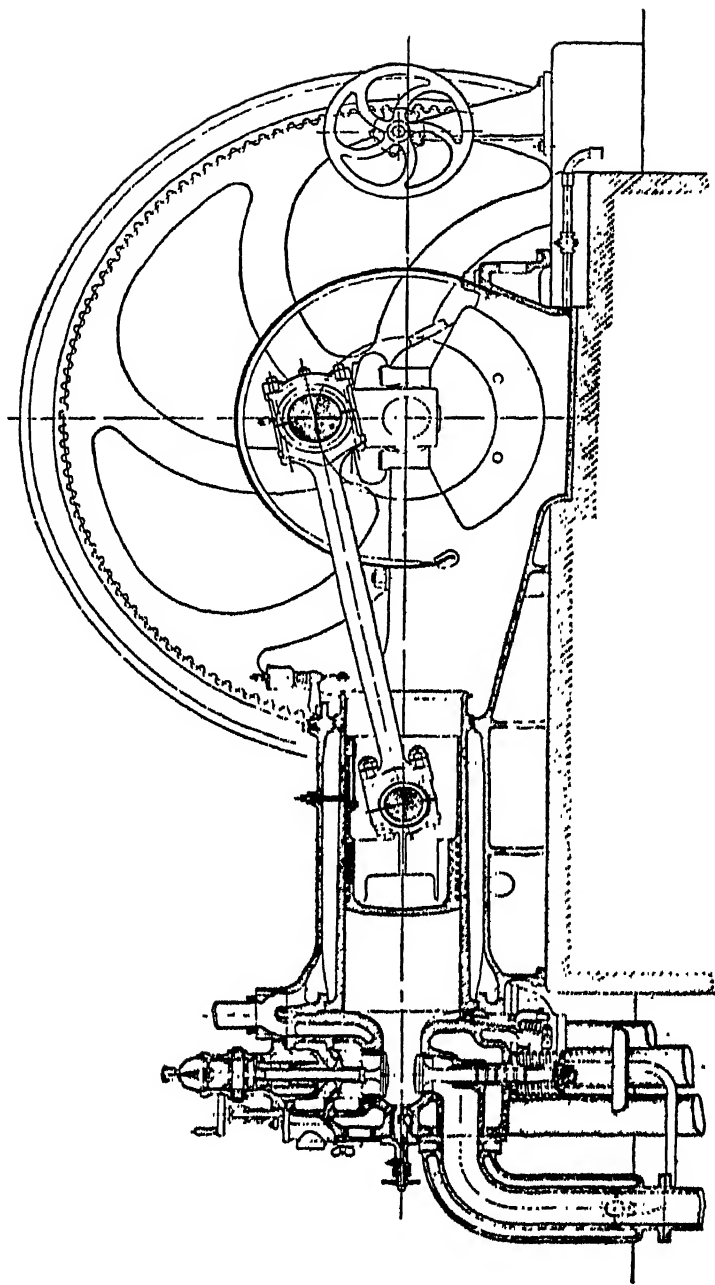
SECTION OF A MODERN GAS-ENGINE.
